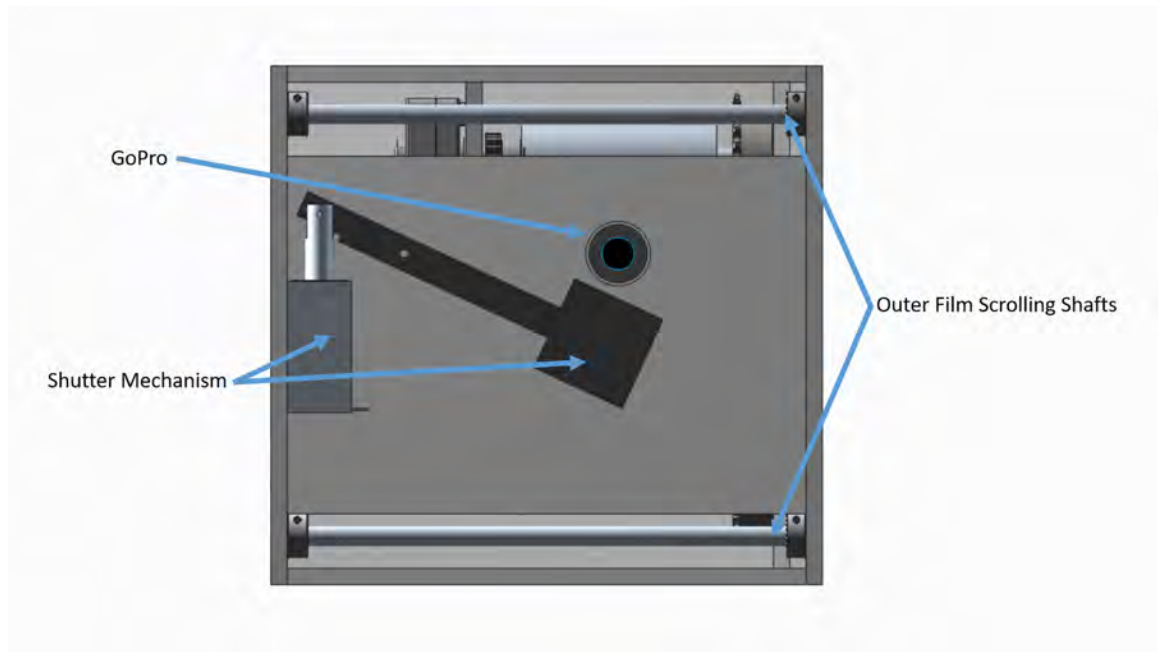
Front view with heat shield removed. [CREO Rendering]
